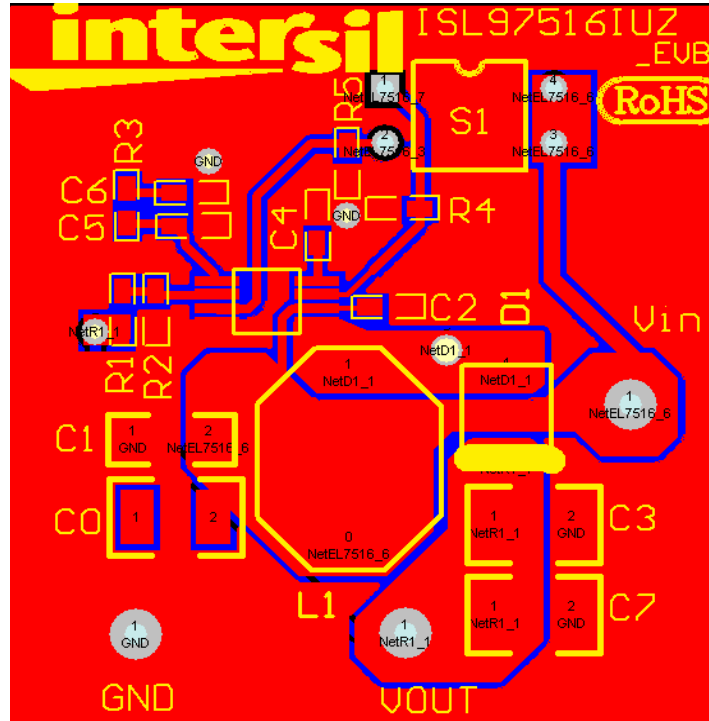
EVALUATION BOARD ASSEMBLY LAYER
